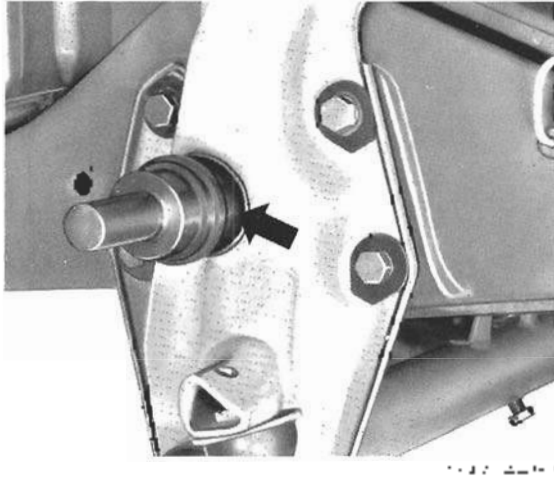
Drift is used to drive in needle bearing and metal bushing. A special contact face at arrow.
